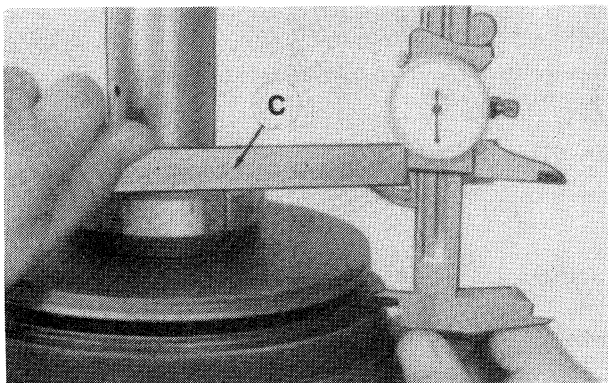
To adjust Belleville spring installed height, place a straightedge (C) across machined surface of nut and measure between straightedge and surface of pressure plate. Refer to text.
